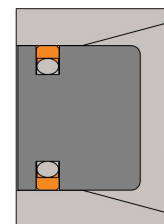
Force resizing sleeve over PTFE seal. Seal is ready for use
